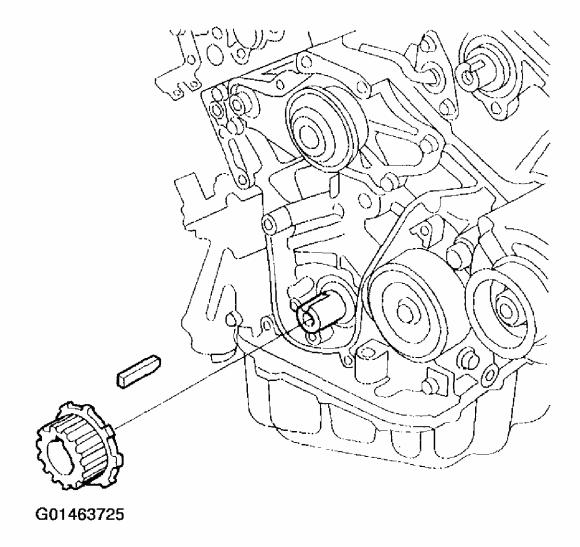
Removing The Timing Belt Drive Pulley Courtesy of AMERICAN HONDA MOTOR CO., INC.
